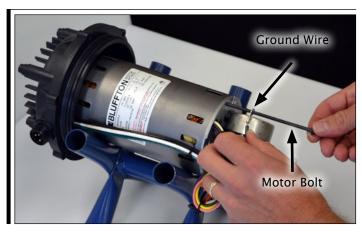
| Pull motor bolt at right of motor lead wire assembly and slip the ground lug of the bulkhead over it and reinstall.
